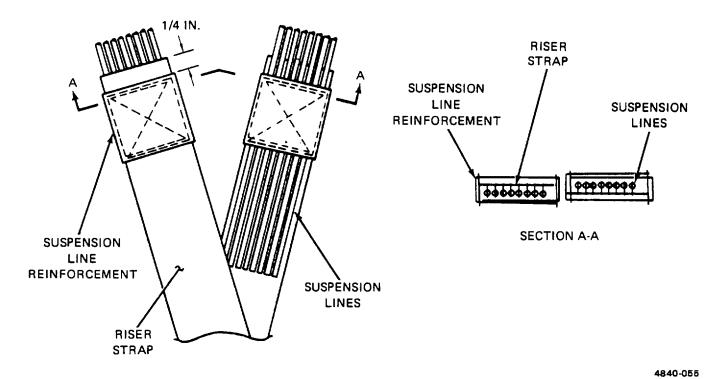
Suspension Line Reinforcement Replacement Details.
